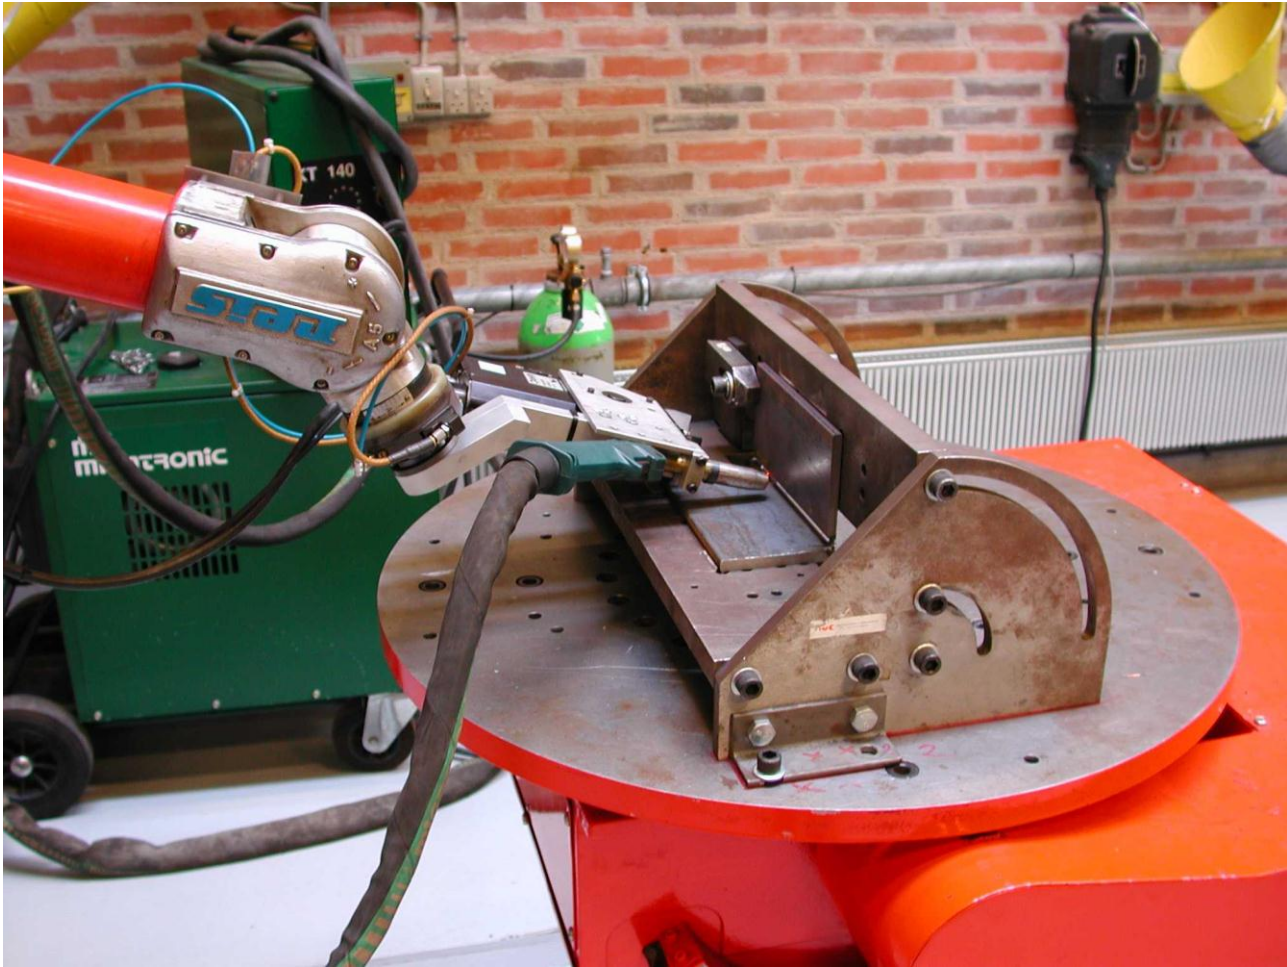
Workpiece with HalfV-Joint inserted in the welding fixture mounted at the turntable. At the robot arm is mounted a welding torch and a laser scanner.
